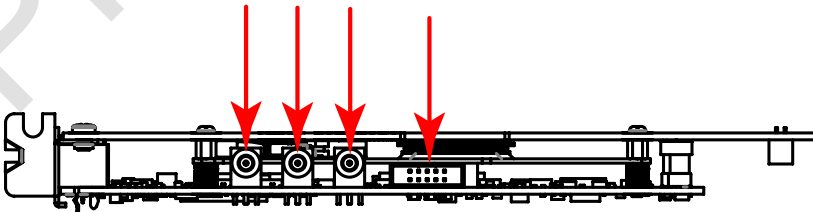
HDV62A PCB Side View (showing I/O bracket connectors)
